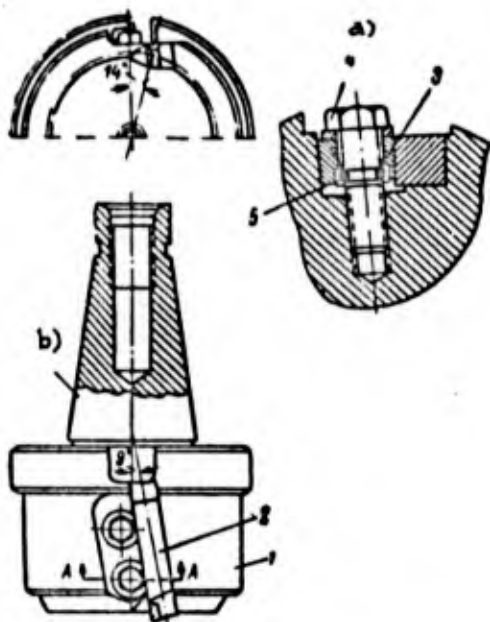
Design of Inserted-Tooth End-Milling Cutter, Carbide-Tipped, up to 100 mm Diameter
